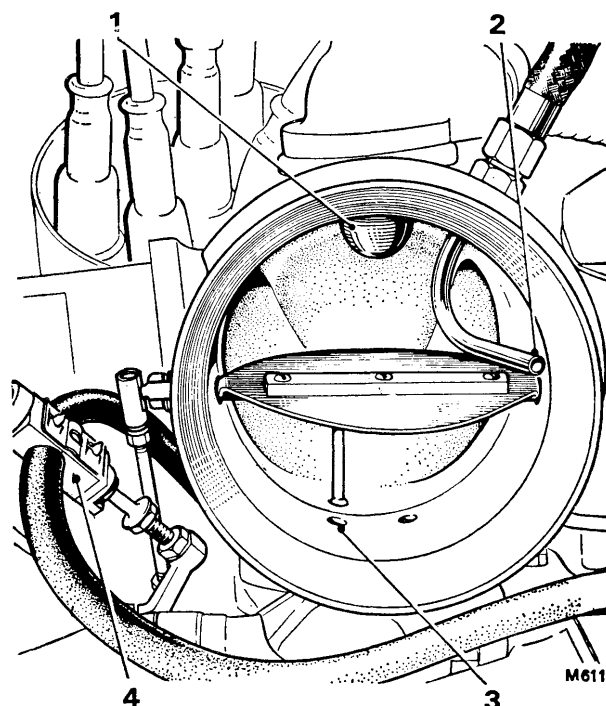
HOT IDLE MIXTURE COMPENSATOR FEED (Current Cars)
